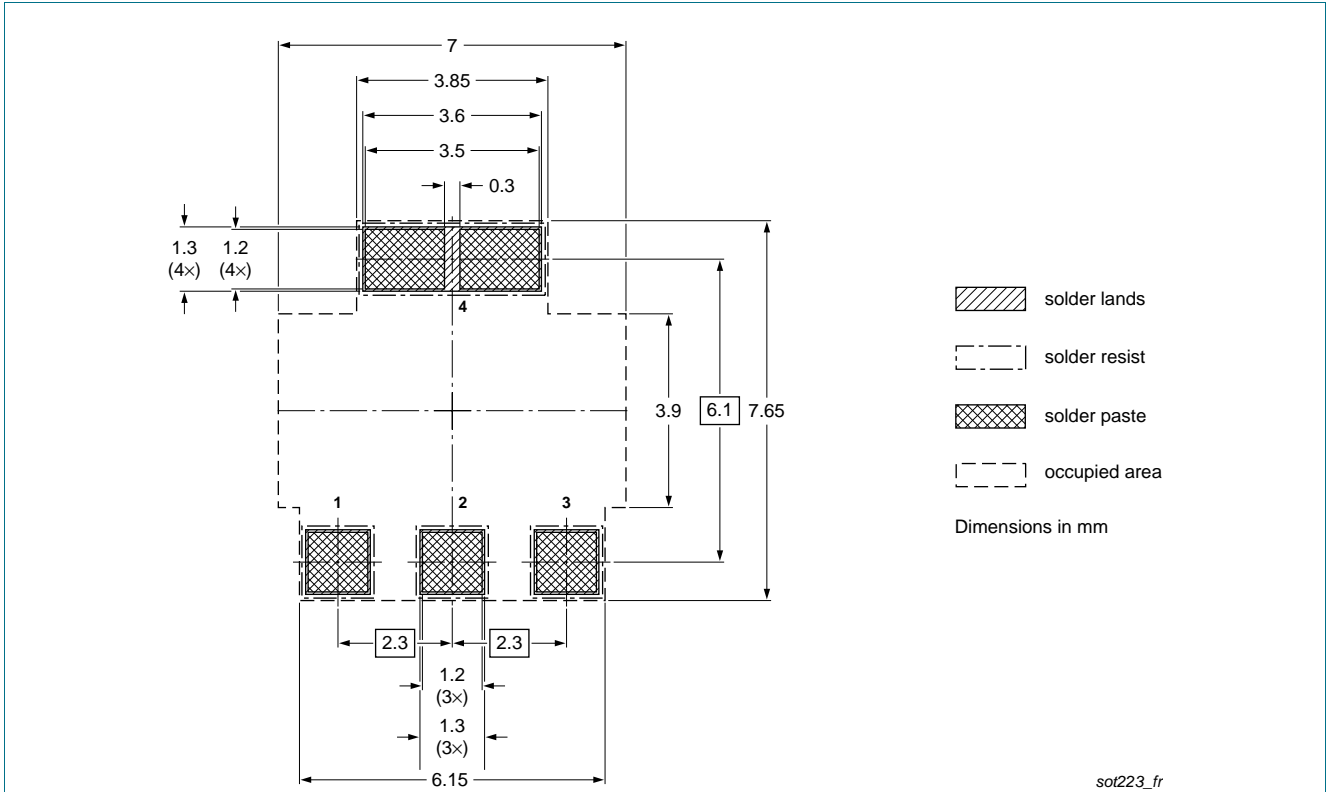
Reflow soldering footprint for SOT223 (SC-73)
